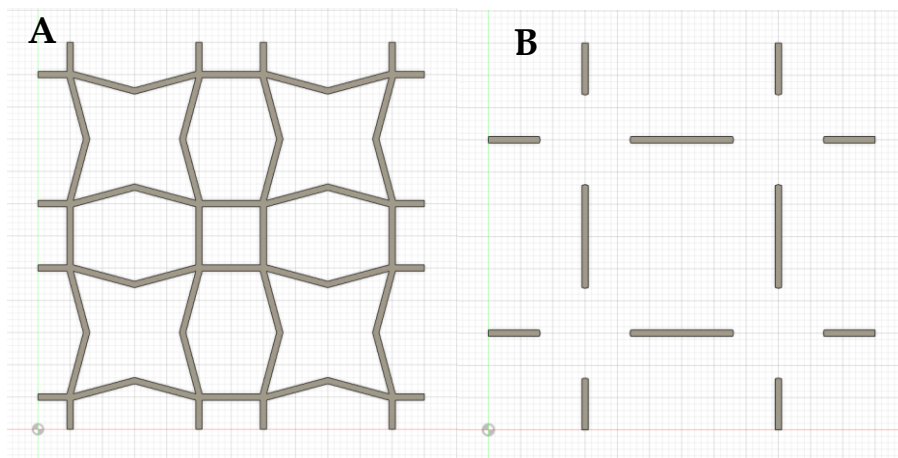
Design to print with two materials. A) Structure without beams; B) Only the structural beams.
